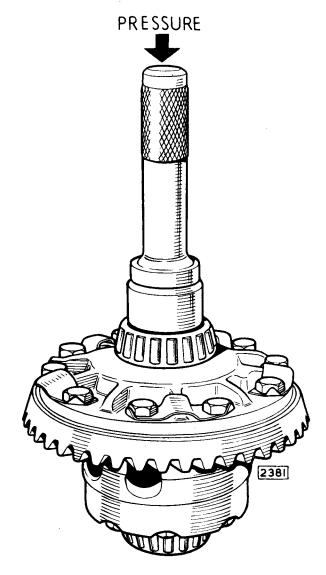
Replacing the differential bearing using Churchill Tool No. 550 with adaptor No. SL 550-1.
